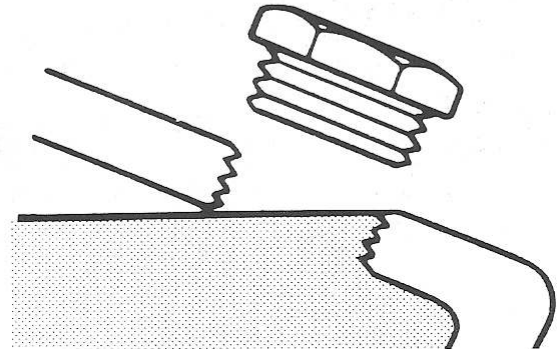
Correct final drive gear oil level (Sec 38)
